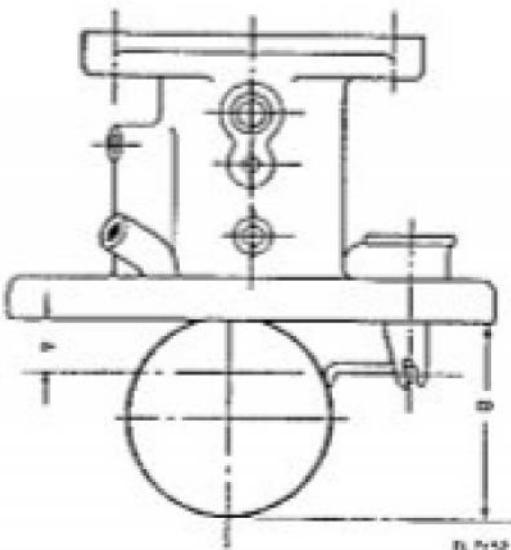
Carburetor fuel level and float setting dimensions (1 1/8 and 2 1/8 respectively).
